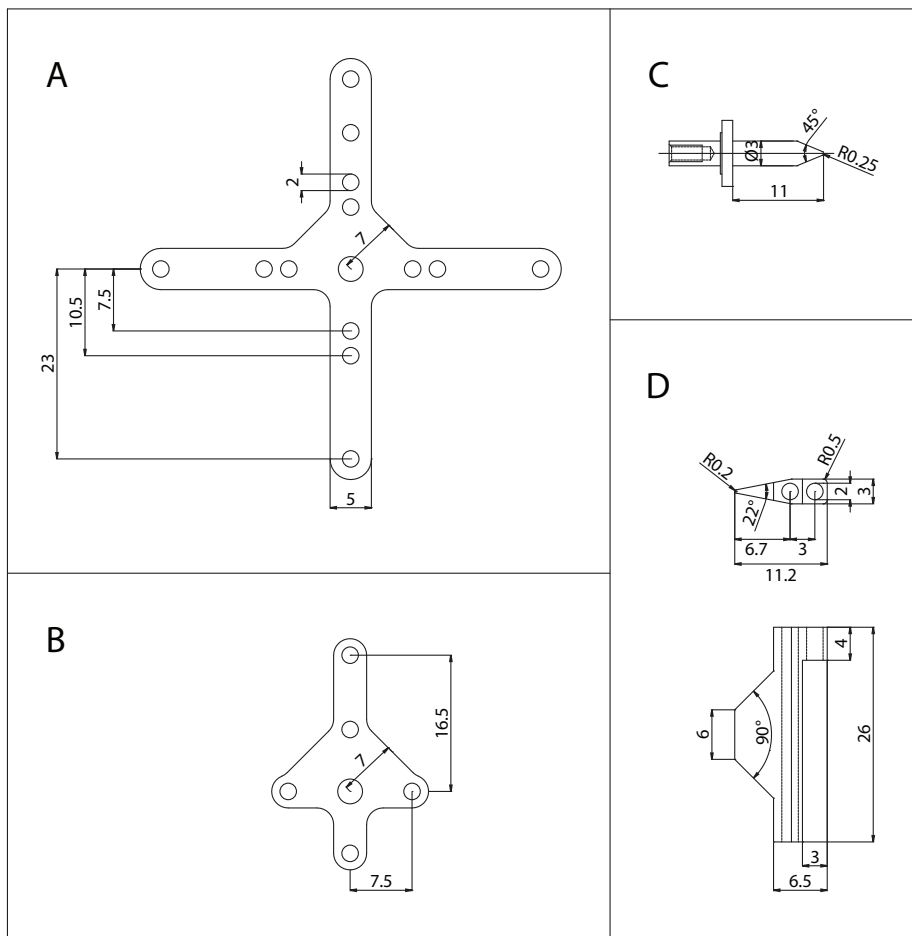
Relevant dimensions of the trap components, in millimetres: top ceramic holder (A), bottom ceramic holder (B), tip electrode (C), blade (D).
